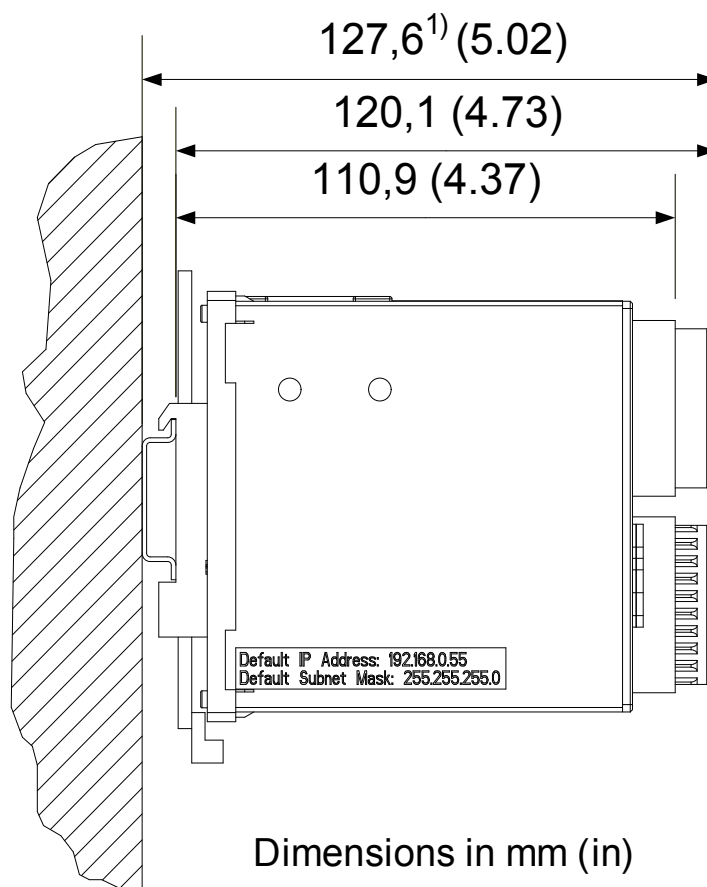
Dimensional Drawing of the SICAM AI Unit
